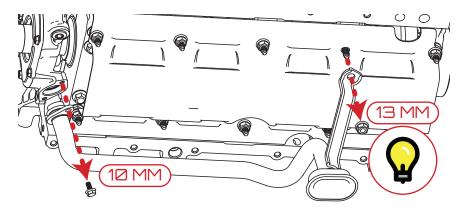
Removing the Factory Oil Pickup Tube (Screen)
